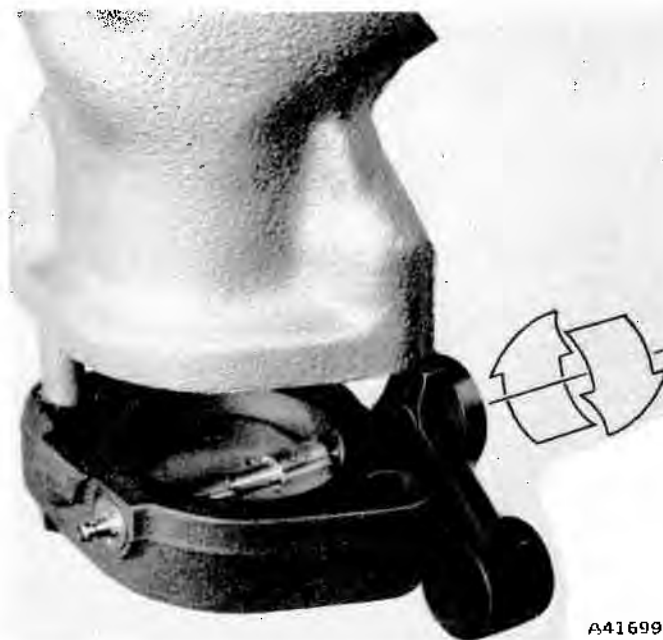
Exhaust Manifold Heat Valve — V-8
